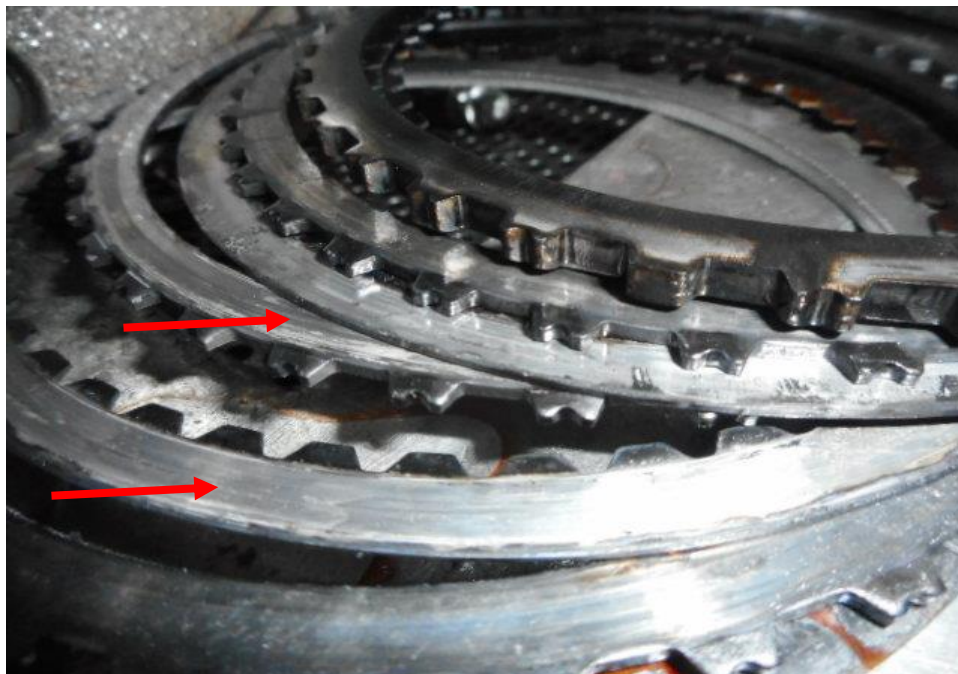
the close up view of inside the gearbox unit of the Insured Vehicle at the time of our inspection. The clutch packs (arrowed) component in the gearbox unit is observed to be damaged with scratches and friction burnt marks on the surface on the clutch packs linings, this is the cause for the complained problems of the vehicle being unable to move despite shifting into gear on the Insured Vehicle.
